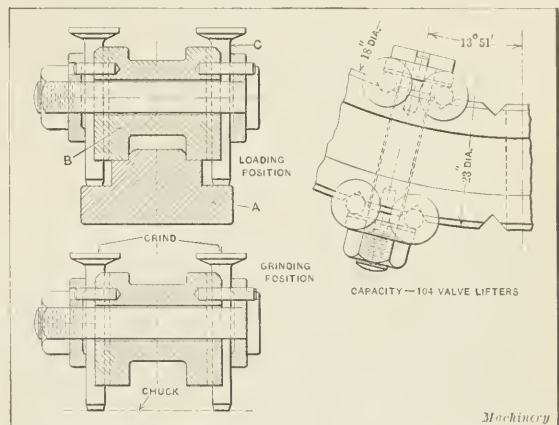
Clamping Fixture used on Blanchard Vertical Surface Grinder for holding Valve Push-rods
